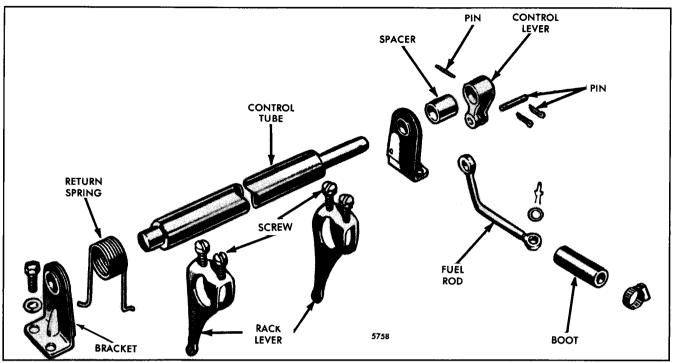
Injector Control Tube Assembly (Non-Spring Loaded - In-line Engine)
